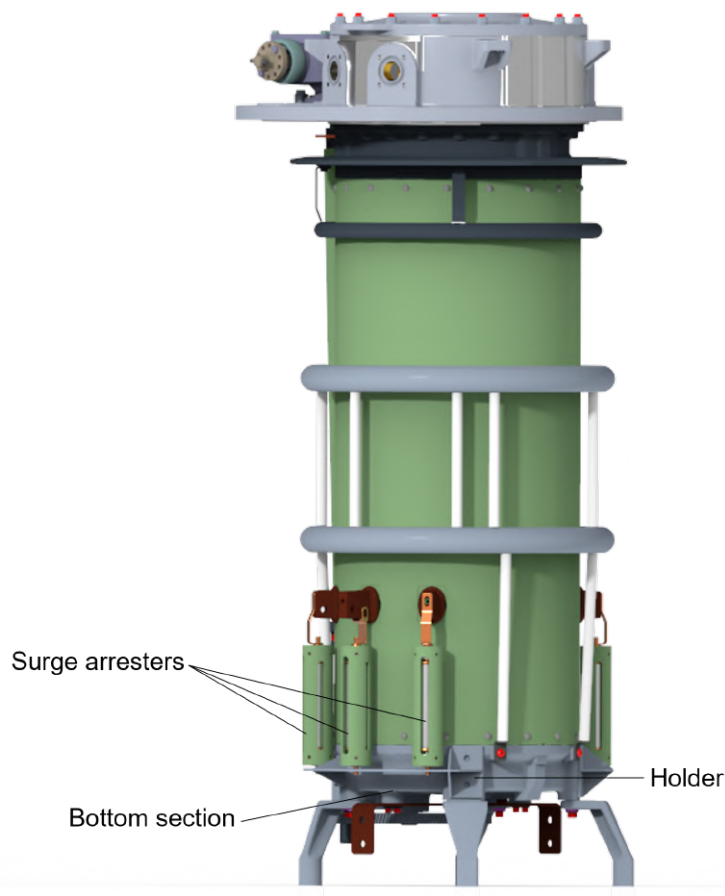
Concept "SixStanding Casting" mounted on OLTC.
